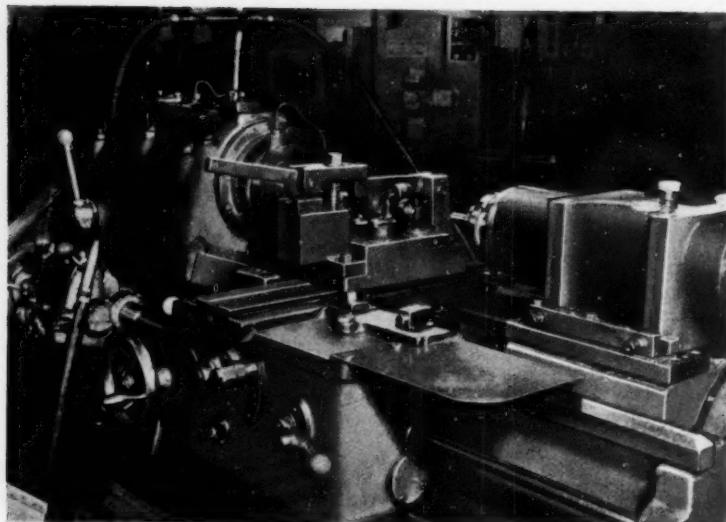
This Adapted Munktell High-speed Lathe, Equipped with a Heald Fine-boring Head, is Employed for Finish-boring the Pressed-in King-pin Bushes
